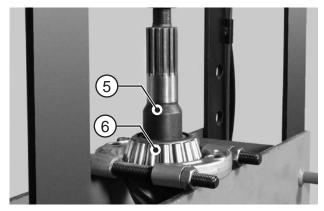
Using a puller and a press, remove the inner bearing (5) from the pinion (6).
